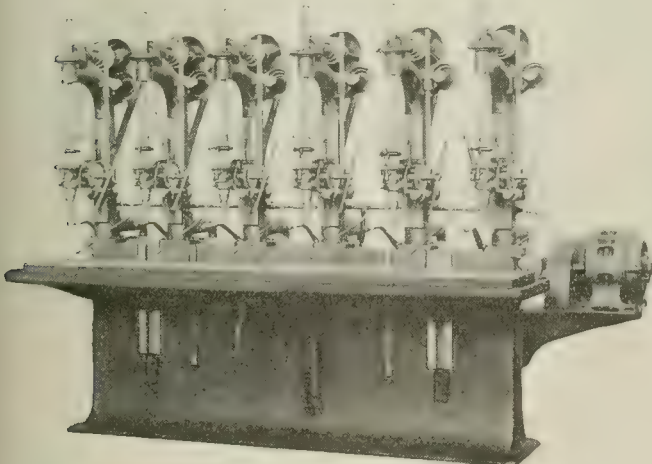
SIX-SPINDLE HIGH-SPEED GANG DRILL EQUIPPED WITH MOTOR FOR INDIVIDUAL DRIVE
